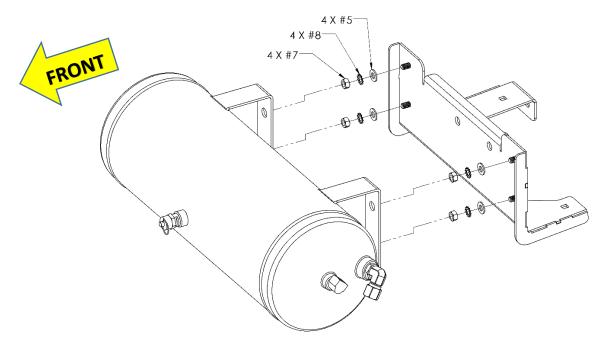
Air Tank Installation onto TUNDRA-201; Exploded View
